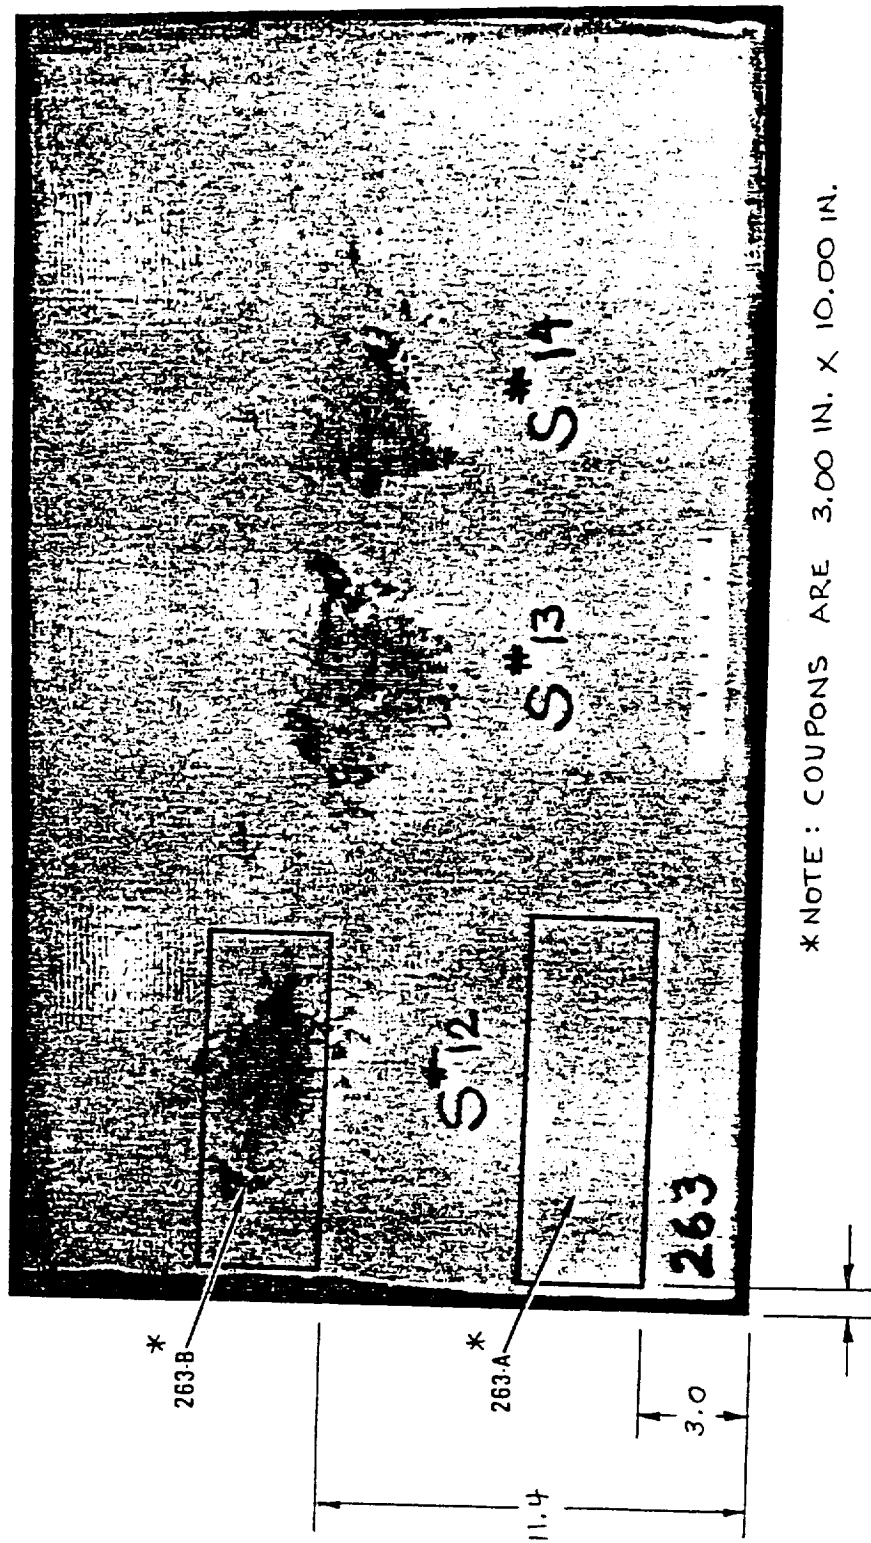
Damaged and Undamaged Compression Test Coupon Locations from Panel 263.
